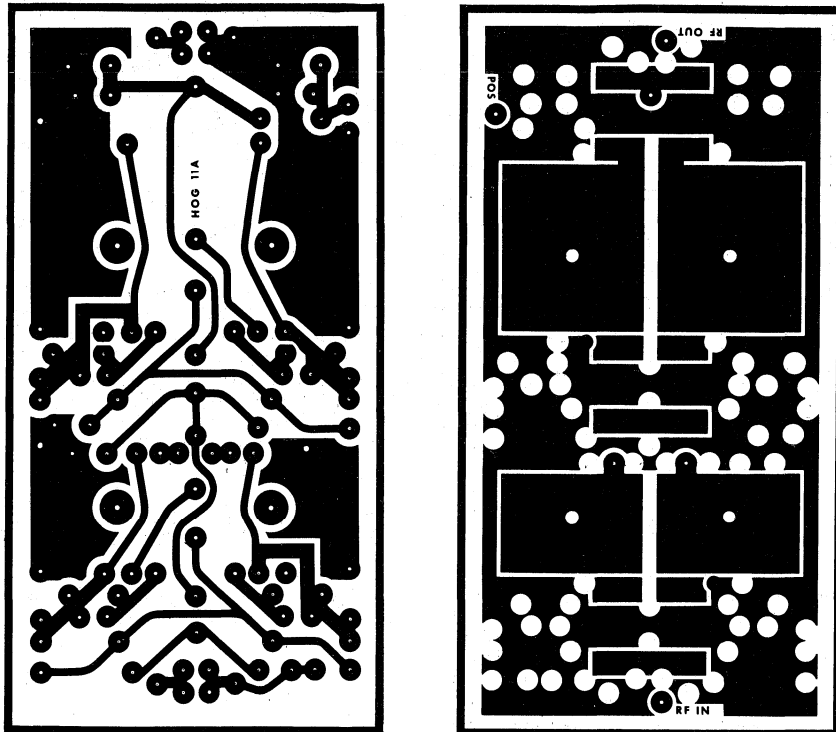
PCB Layout of Low-Cost 20 W Amplifier
